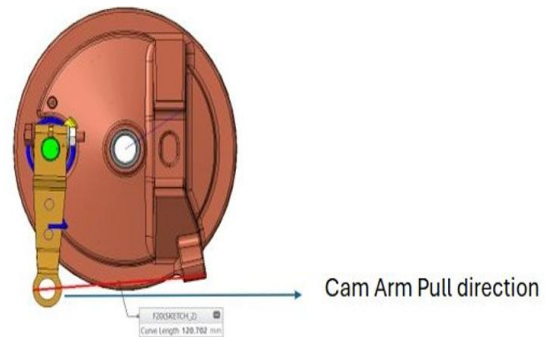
Cam arm pull direction. CAD view of the drum brake assembly showing the cam, the cam lever, and the direction of cam arm pull used to actuate the shoes; the free-position cam arm pull curve length is 120.702 mm.
